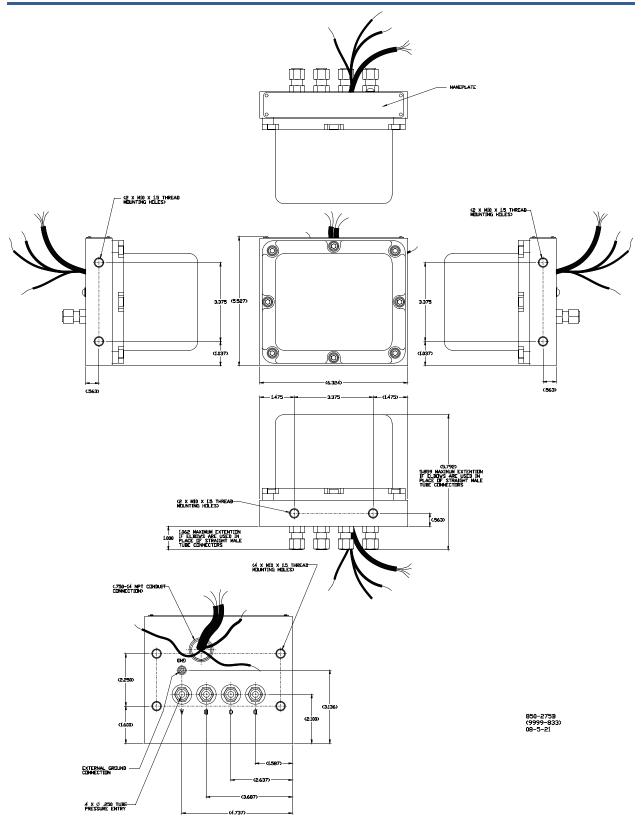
Outline Drawing of Pressure Transducer Manifold
